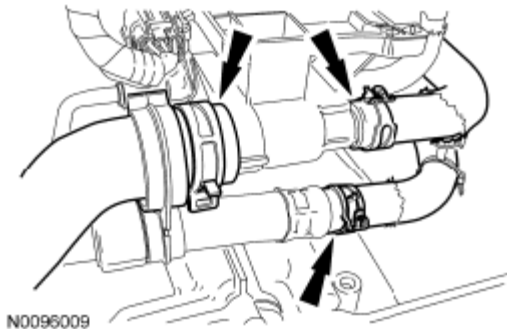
Locating Heater Hoses & Heater Hose In-Line Connector
